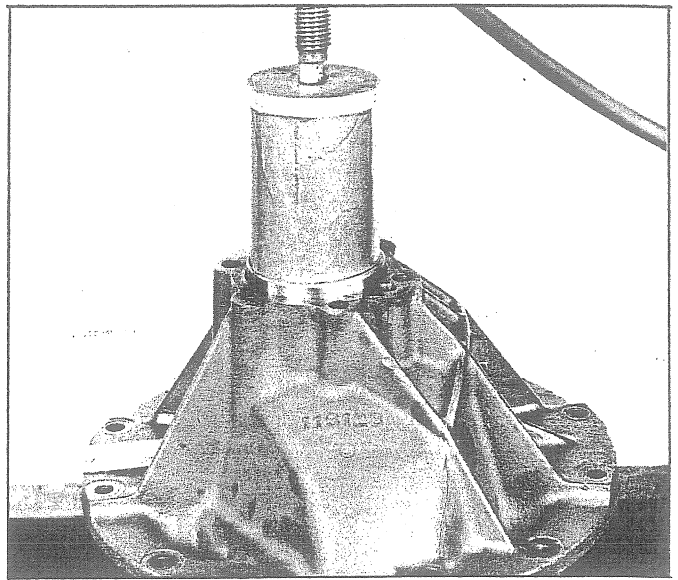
Pressing Pinion Shaft Assembly into Differential Carrier
